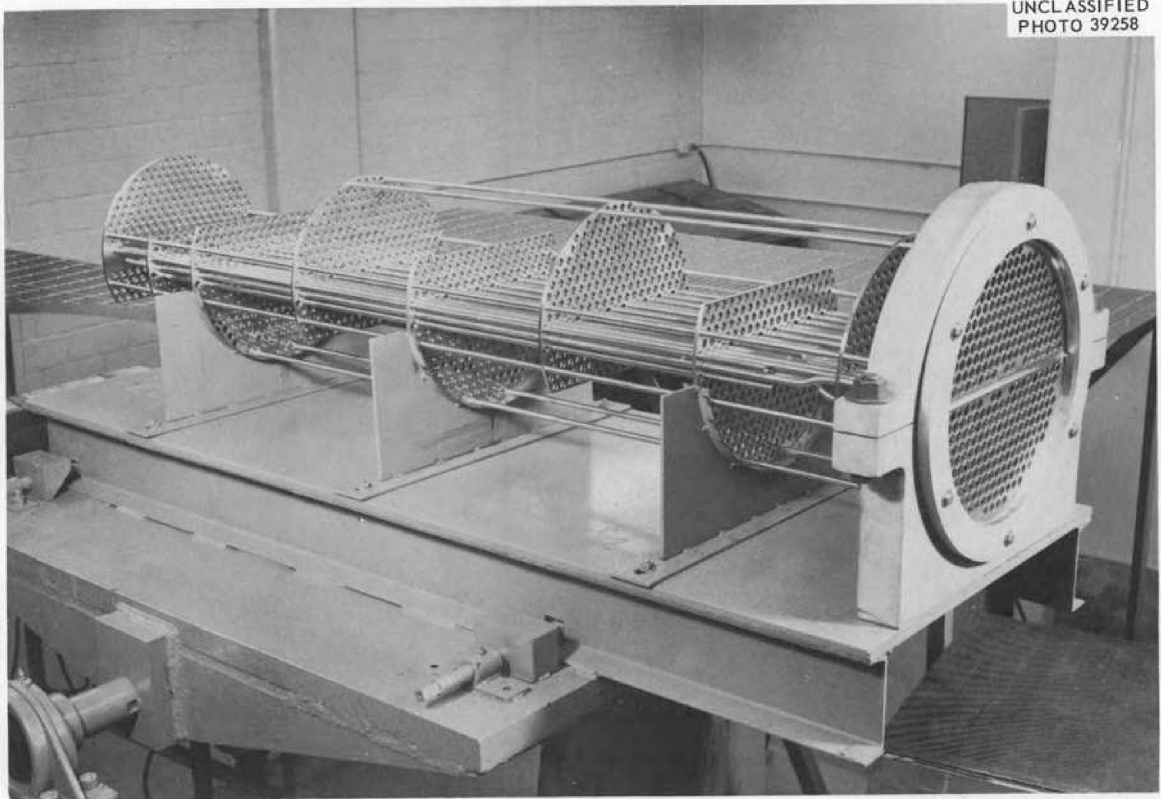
Tube Sheet with Baffles, Support Rods and Compound Bent Tubes Installed.
